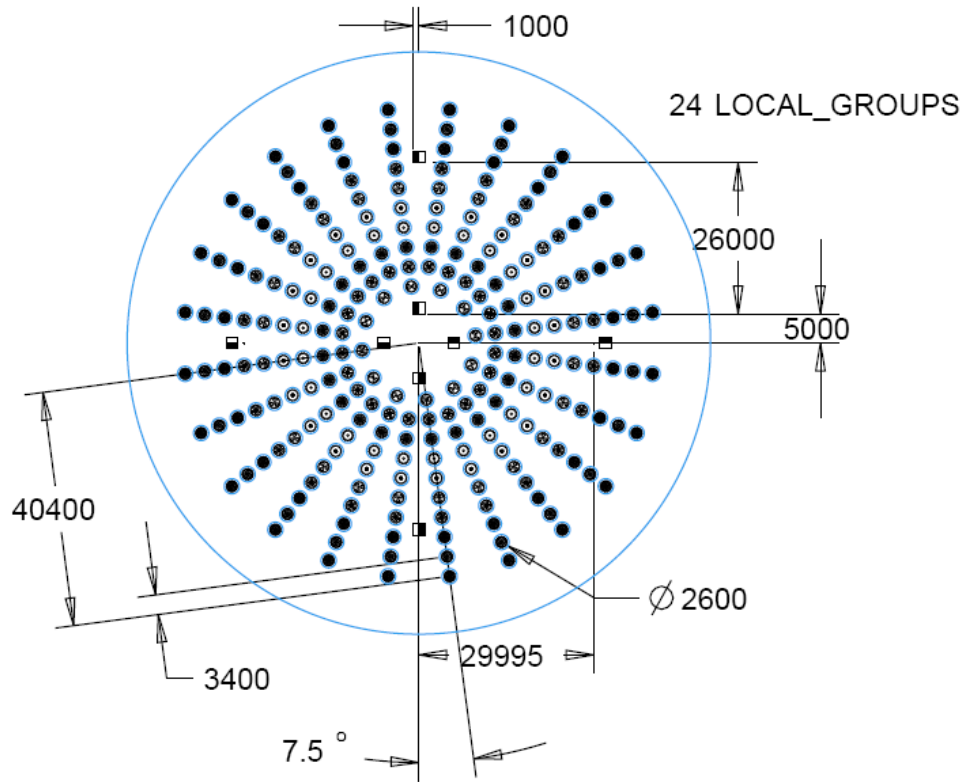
Rotor mask design layout. All dimensions are in μm unless otherwise denoted.
